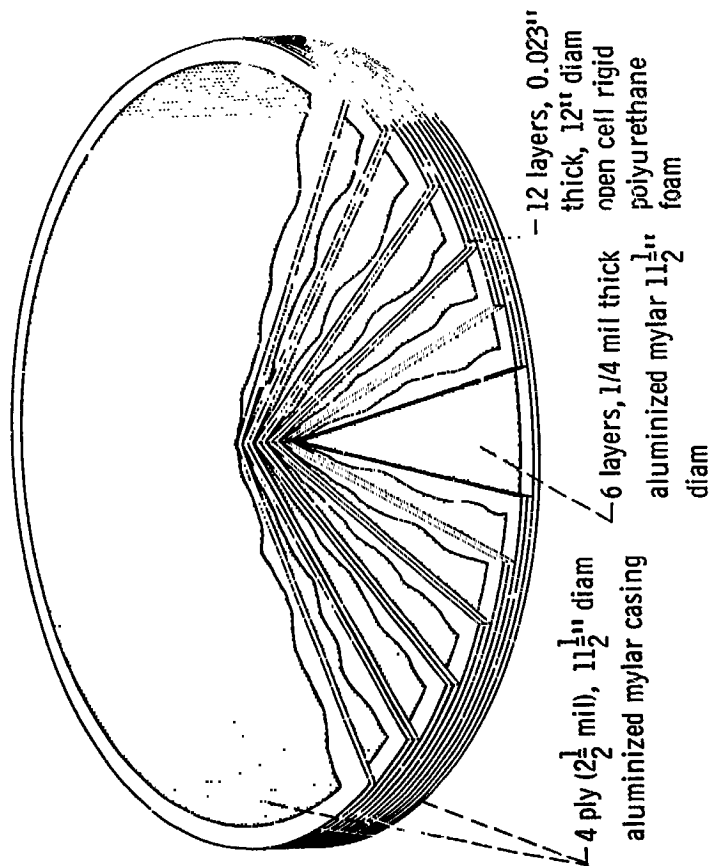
Typical insulation specimen tested in flat plate calorimeter.
